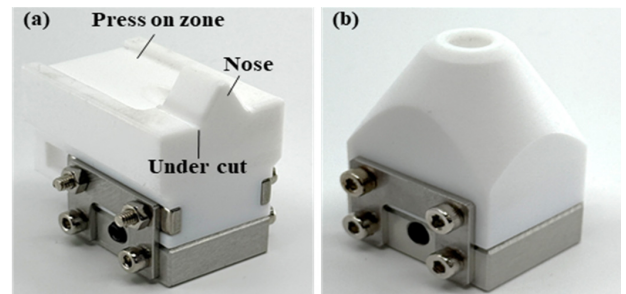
Photographs of welding shoe: (a) butt shoe, (b) round shoe
